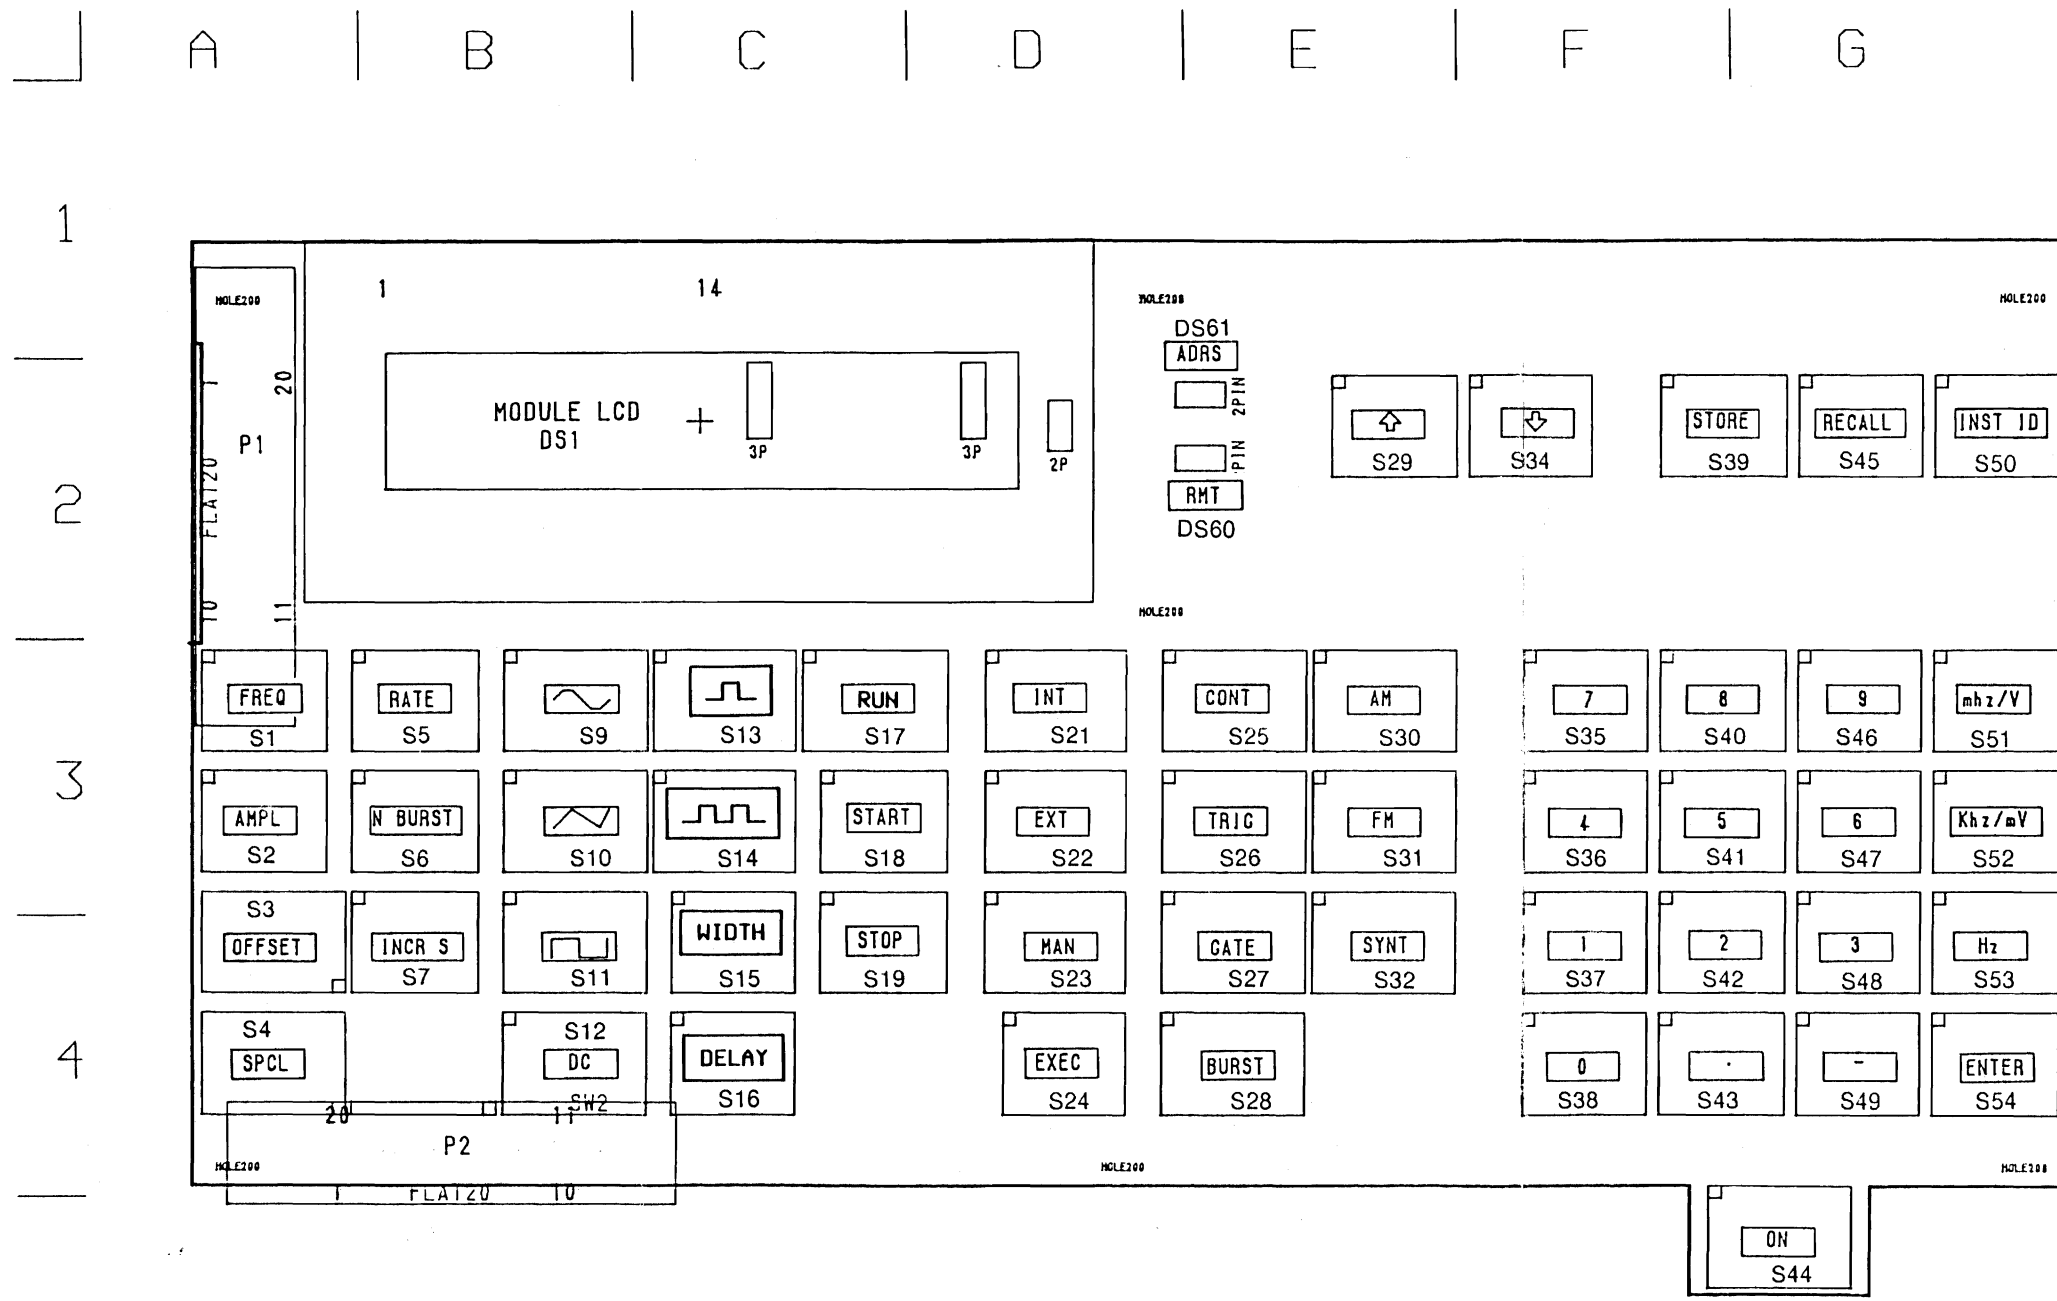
A7 - Keyboard Circuit Board Assembly.
